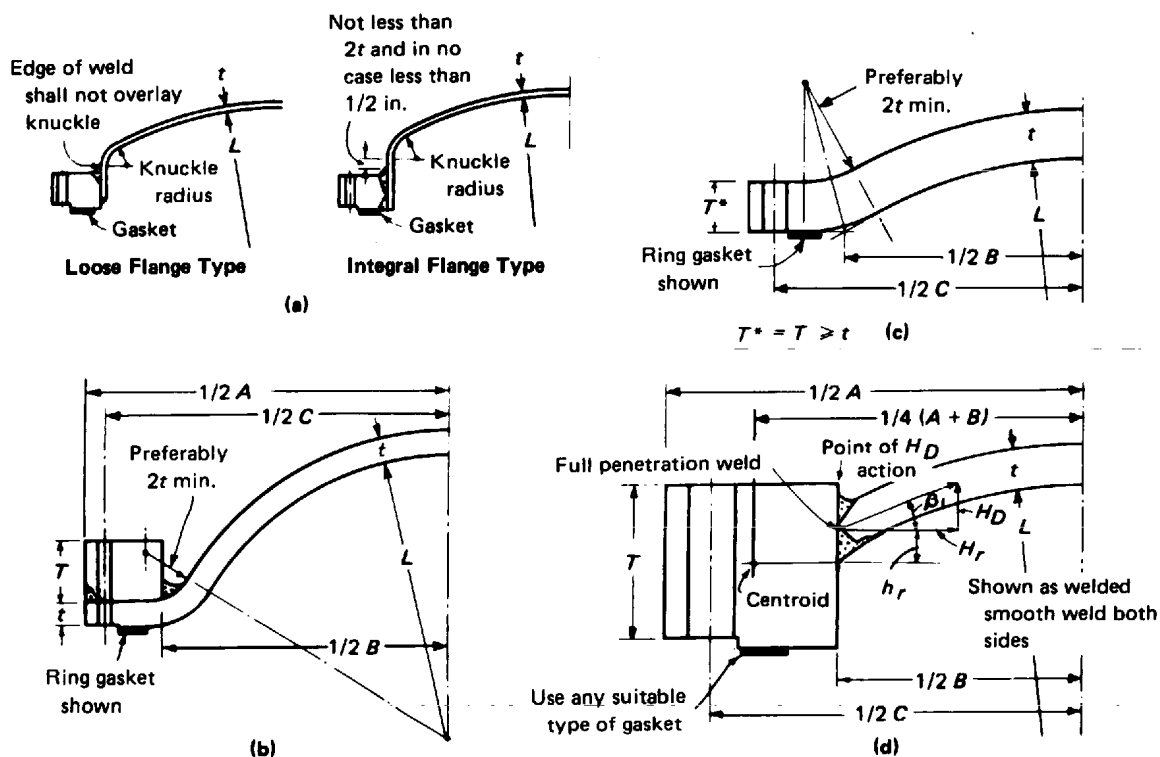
SPHERICALLY DISHED COVERS WITH BOLTING FLANGES
